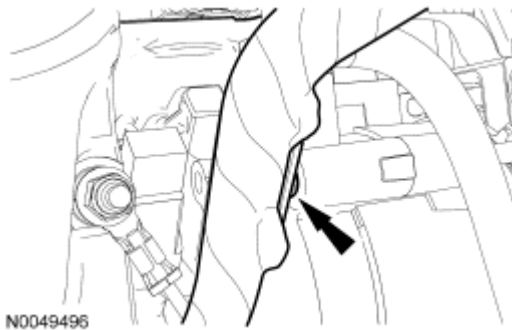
Detaching Wiring Harness Pin-Type Retainer From Back Of A/C Compressor
